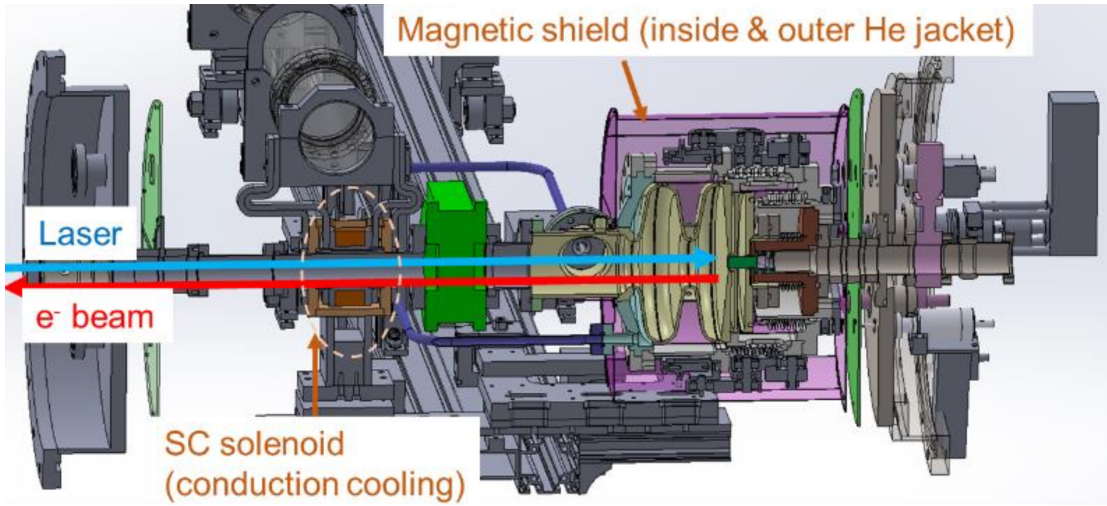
The CAD design of the KEK Gun Test Stand Cryomodule. The KEK gun cavity is inside the pink magnetic shielding. CAD image courtesy of Taro Konomi.
